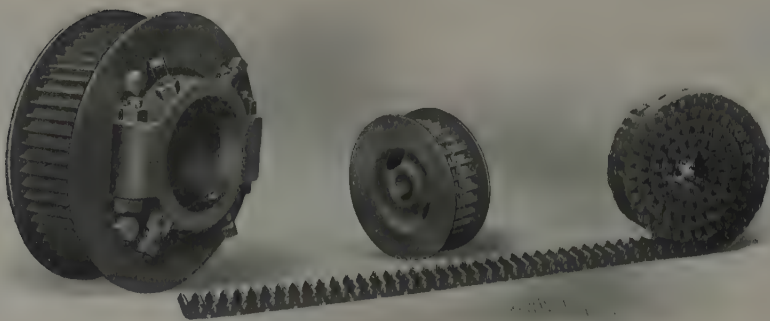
Axle Sprocket, Generator Sprocket and Chain.
